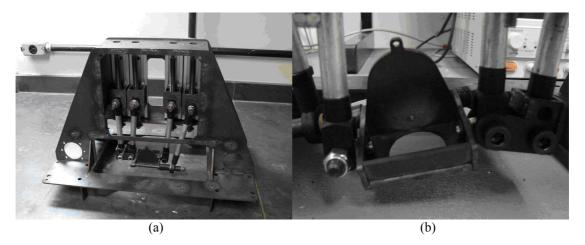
Views of the prototype built. (a) prototype (b) manipulator.
